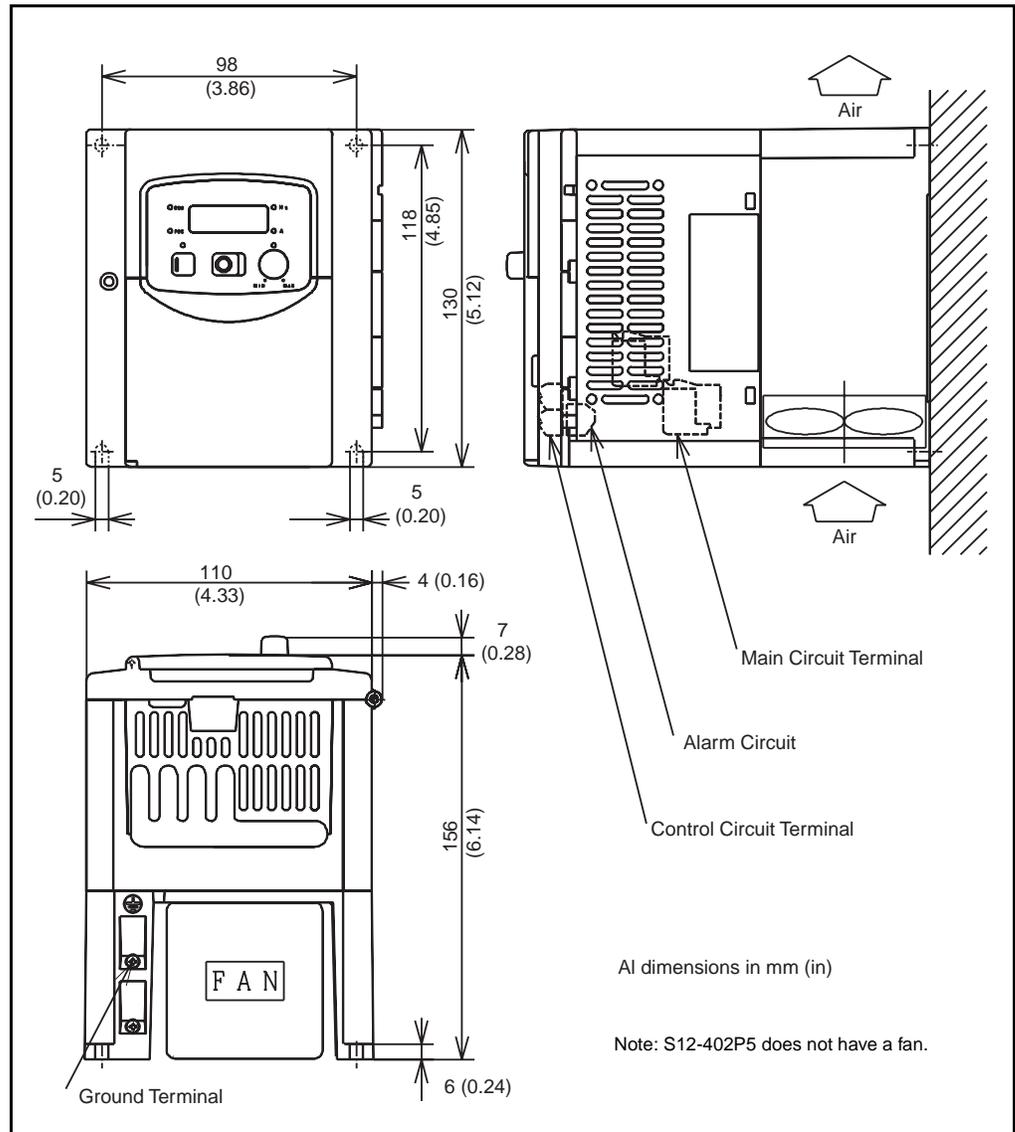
S12-402P5/403P8/405P5 Dimensions
